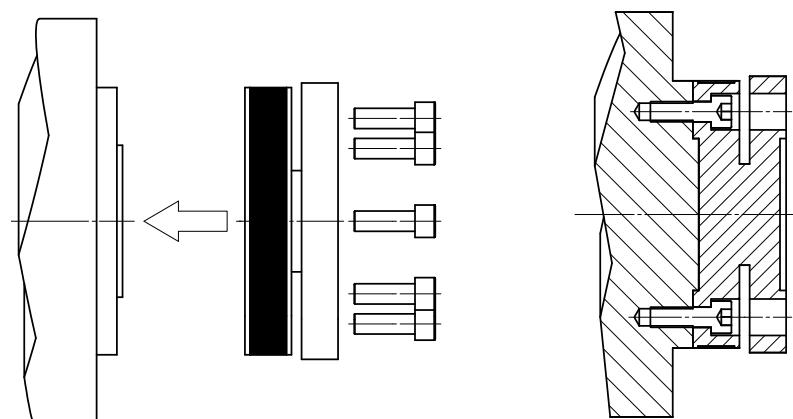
Flange Mounting of TF 213 to TF 219 Sensors
